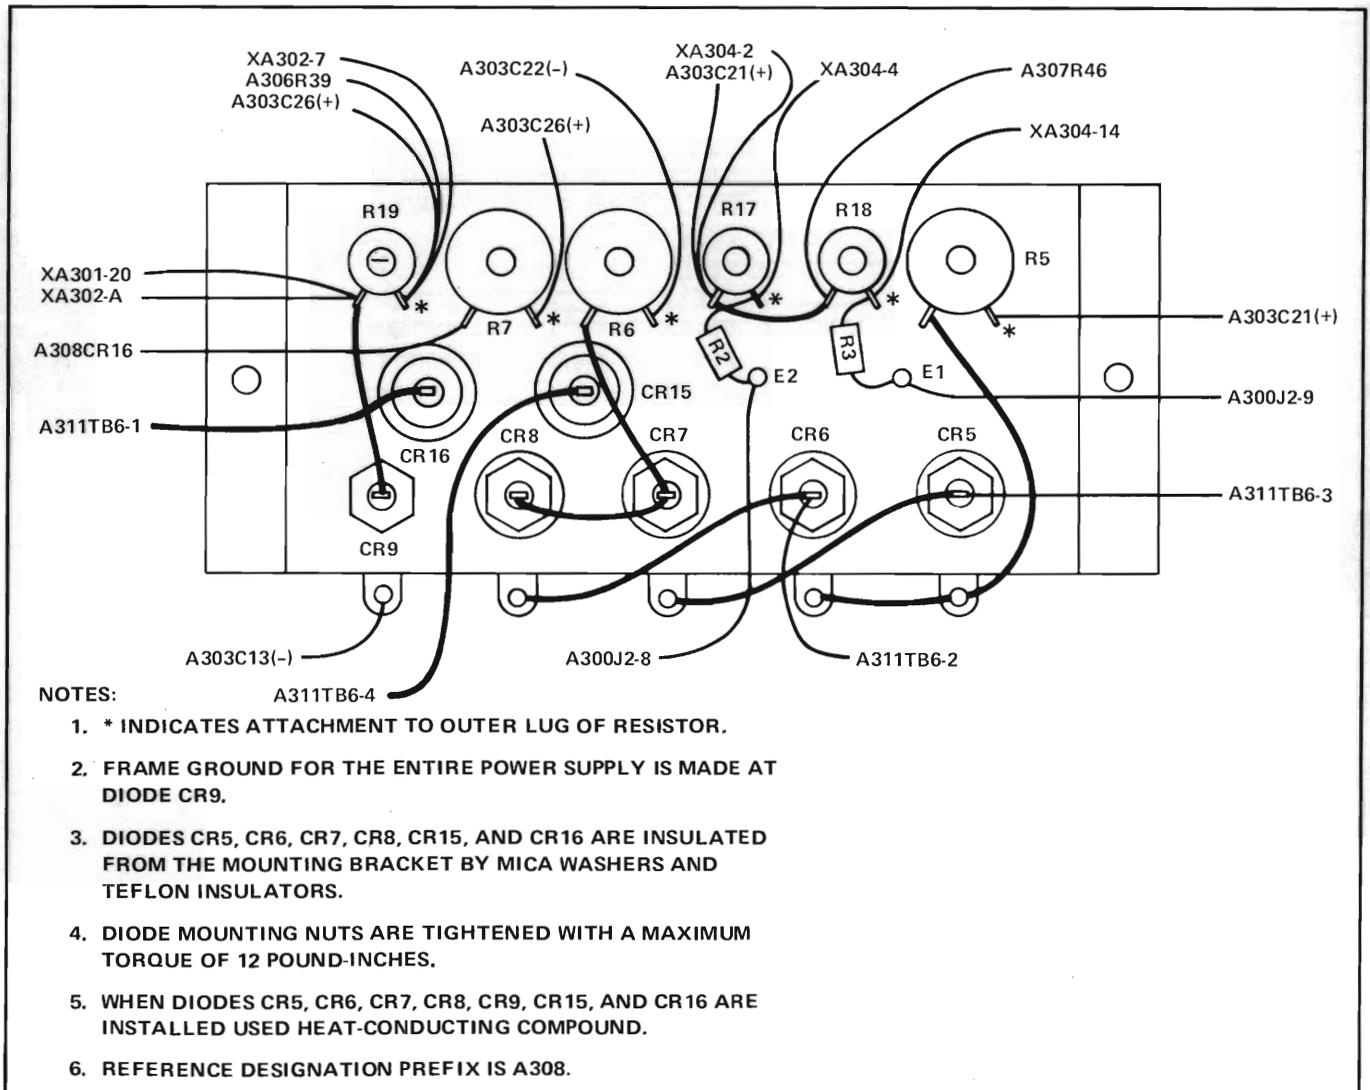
A307 Component Board Assembly (02116-63242), Parts Location and Connection Diagram
